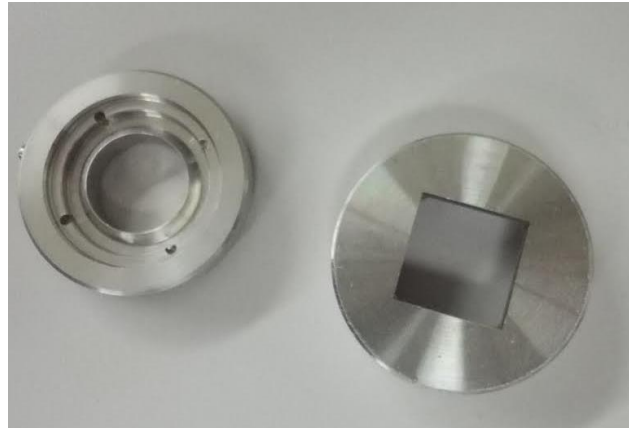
Final version of a stainless steel sample holder for laser flash measurements.
